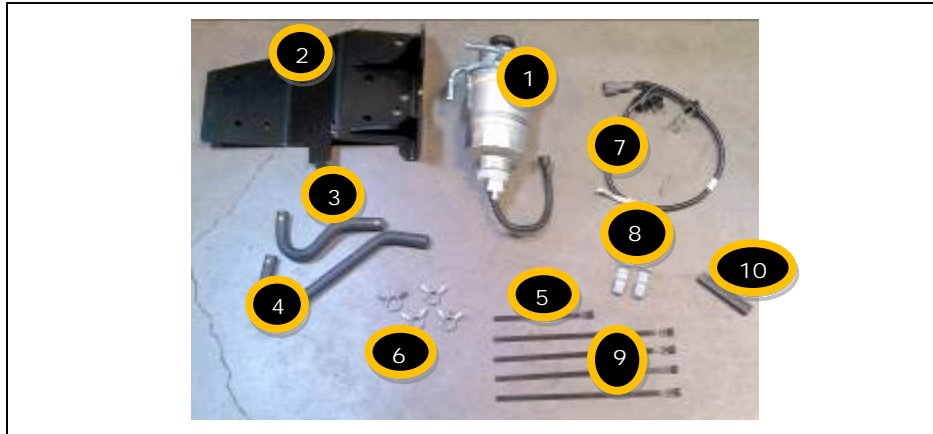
Vertical Exhaust 4HK1 Sedimenter/Pre-Filter Assembly
